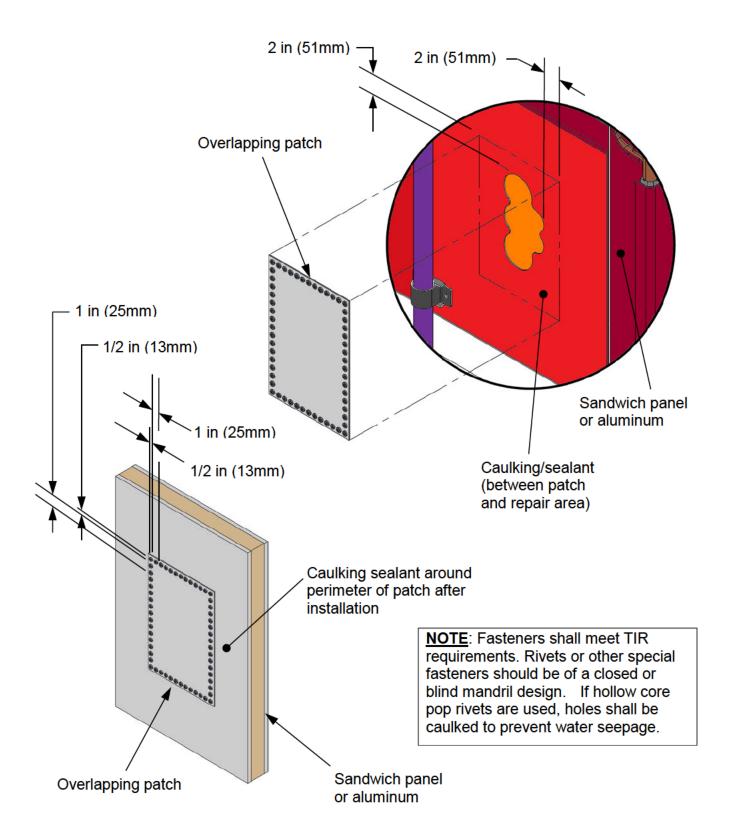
Acceptable wall, roof and floor patches (sandwich or aluminum panel)
